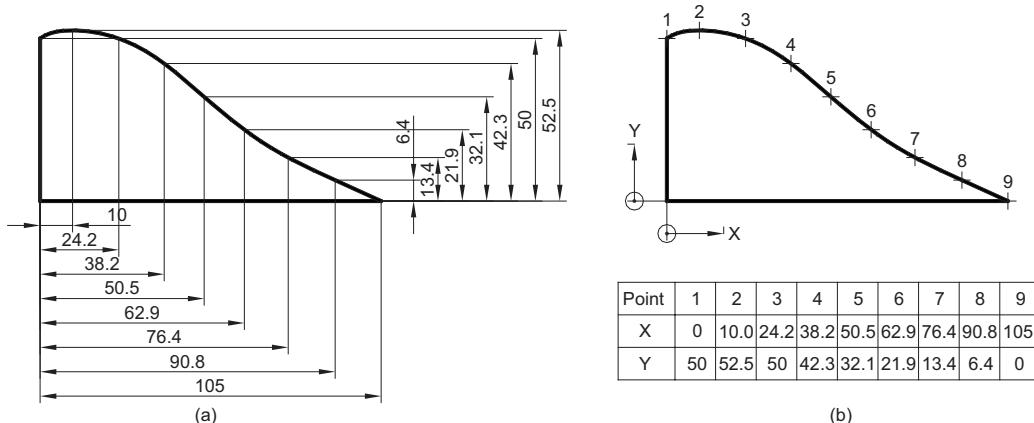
Curved surface dimensioning using (a) parallel dimensioning (b) coordinate dimensioning
